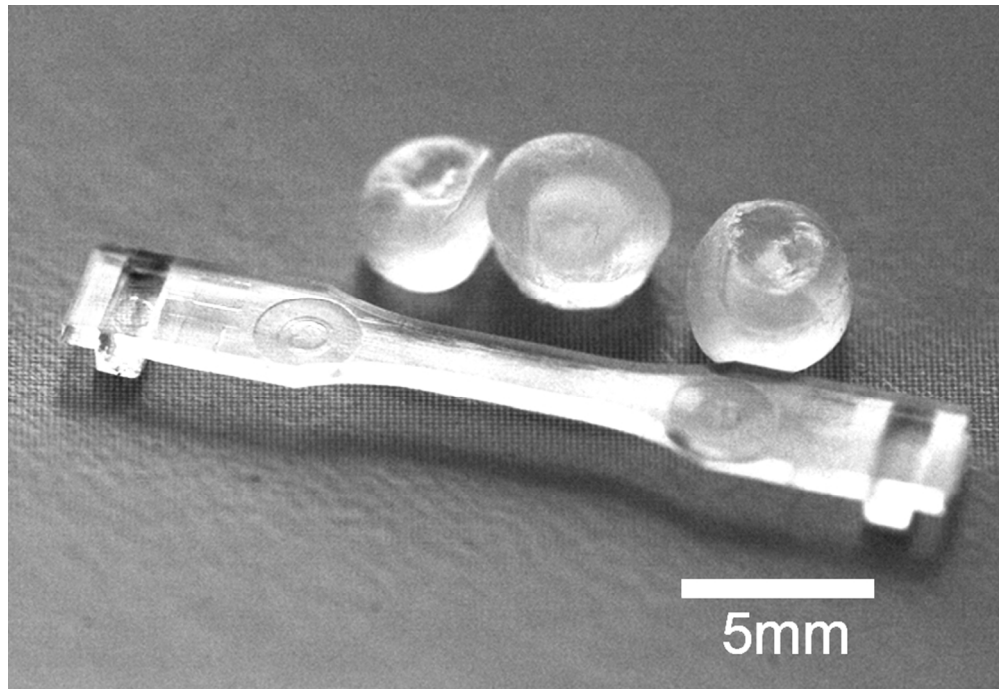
Mold and part: (c) molded micro component with standard polymer pellets
